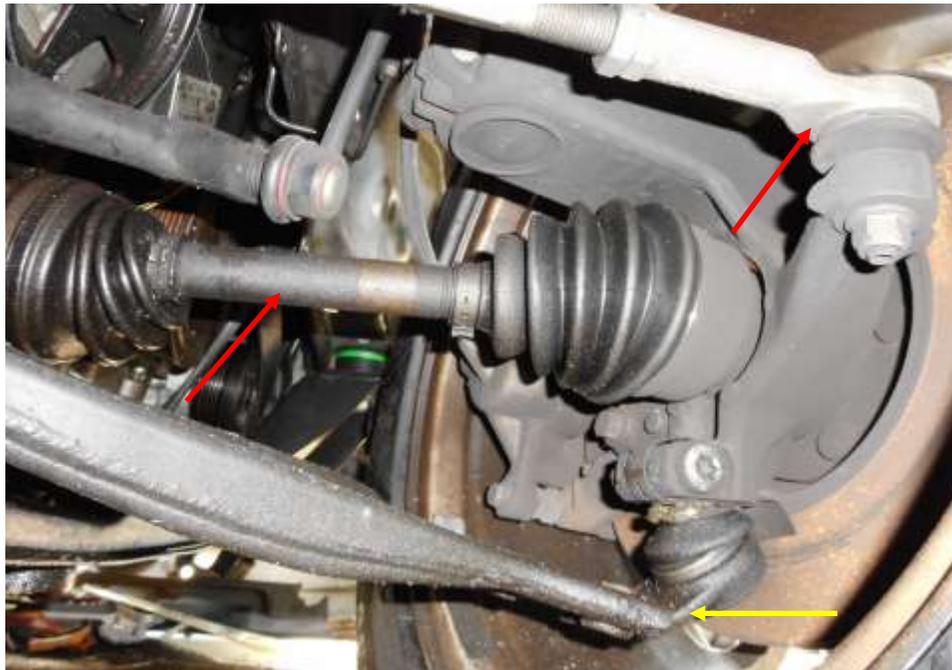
shows the undercarriage components at the front right wheel of the Motor Car. My checks on the underside of the Motor Car revealed damage to the various undercarriage components, the steering rack and pinion, tie rods, tie rod ends and ball joints (red arrow) revealed that these components were all generally in good condition. However, the front right lower arm (yellow arrow) of the Motor Car was damaged.
